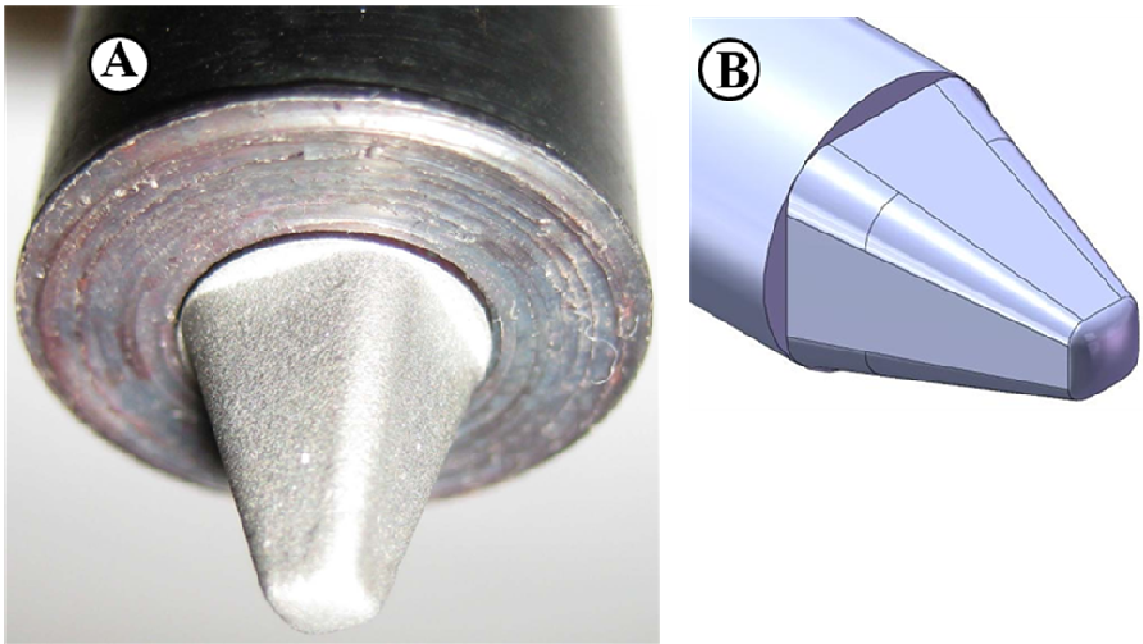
(A) Image of pyramidal H13 tool. (B) Schematic of pyramidal H13 tool.
